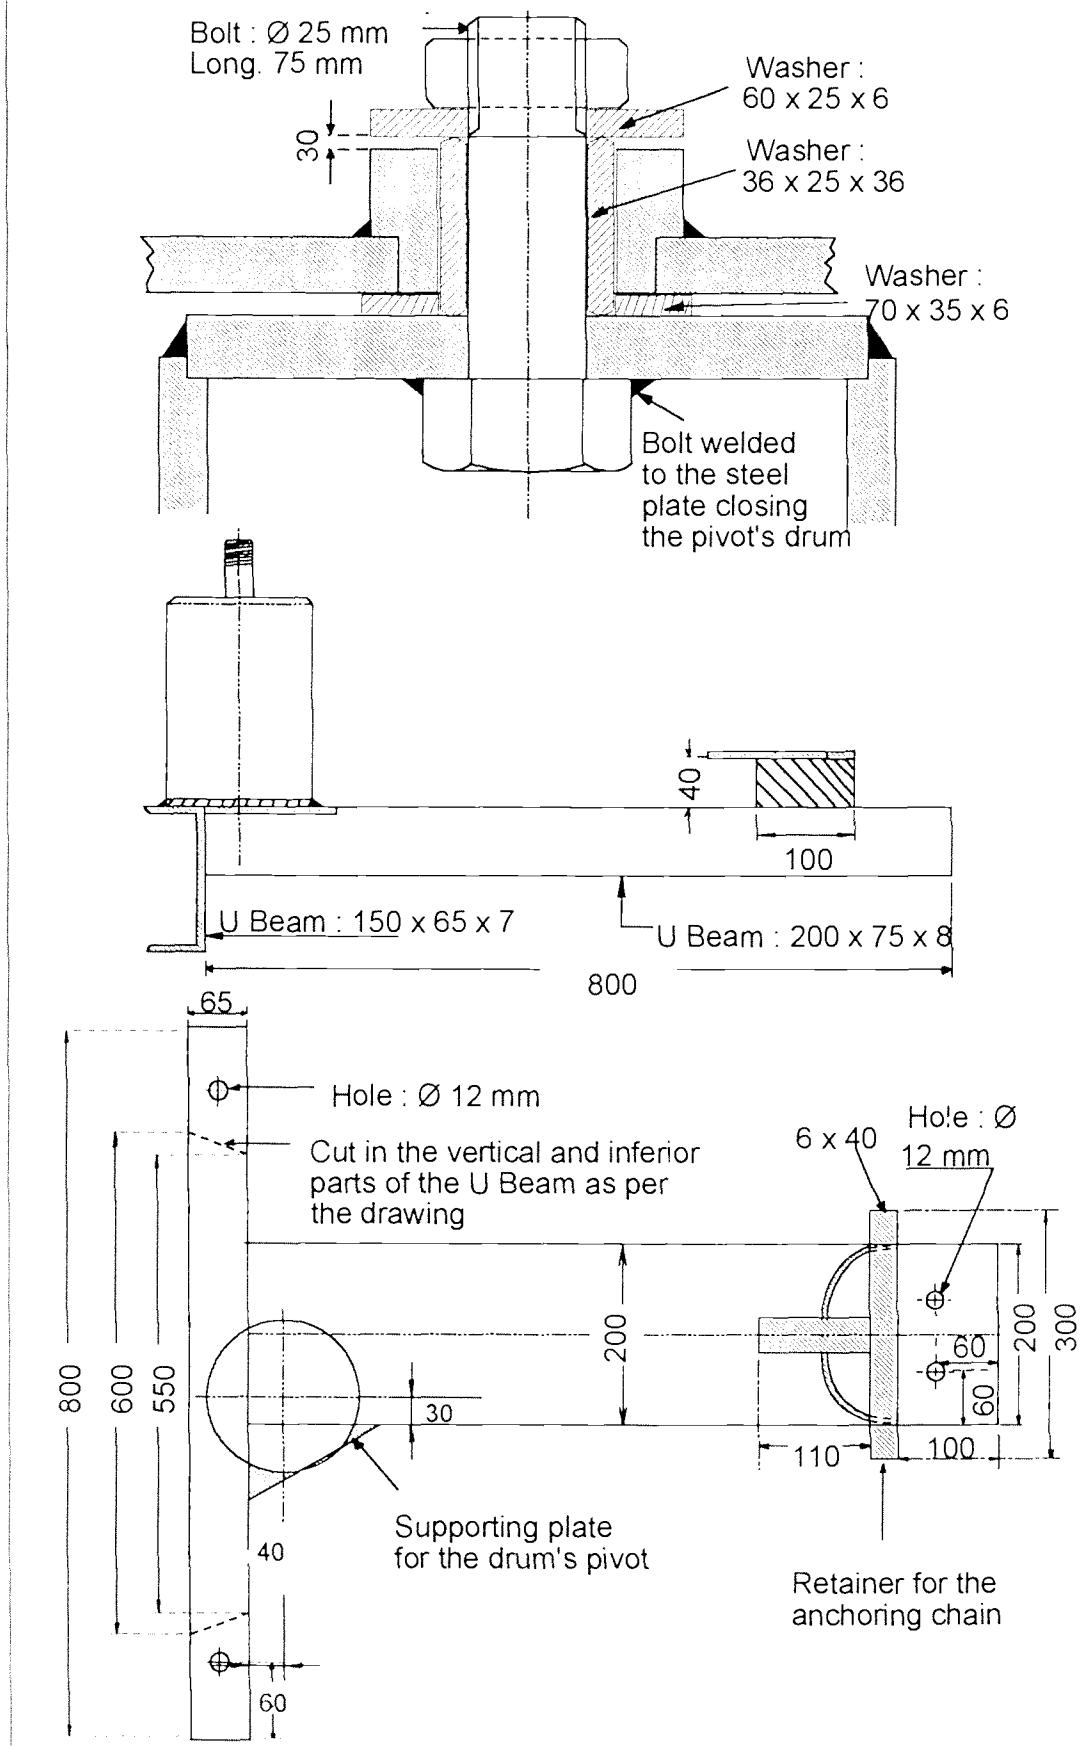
TOP FLANGE OF THE CAPSTAN'S DRUM
